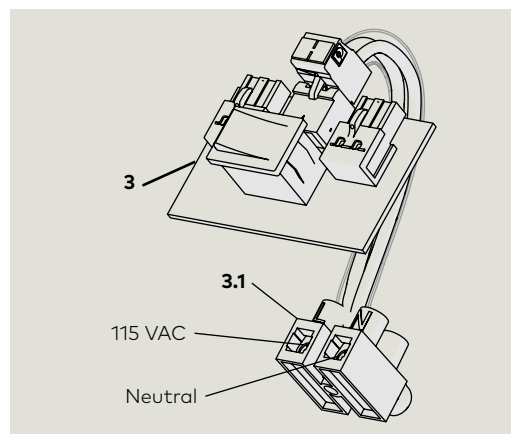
115 Vac terminal block and wire harness assembly
